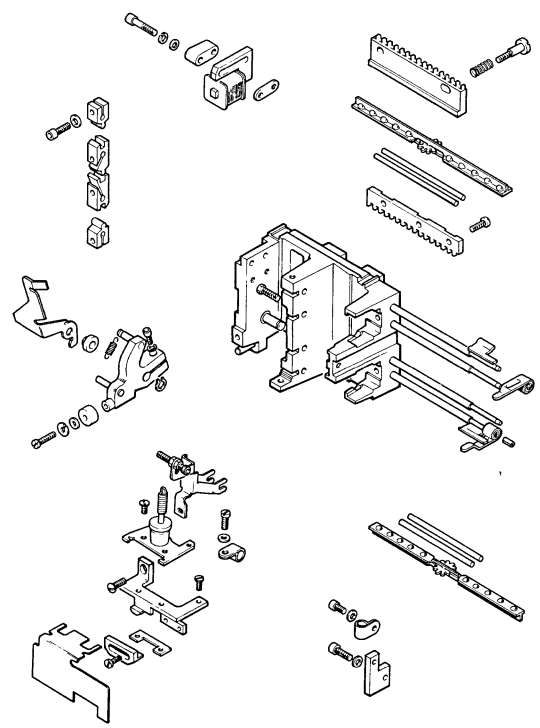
ACTUATOR ASSEMBLY (PART 3 OF 4)
